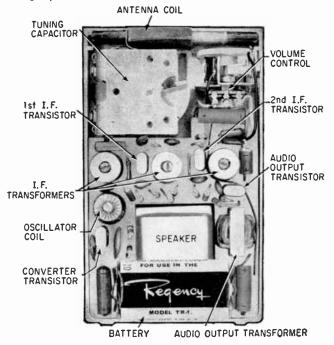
[,]2 Inside view of Regency model TR-1G transistor receiver showing layout of components. (Regency)
